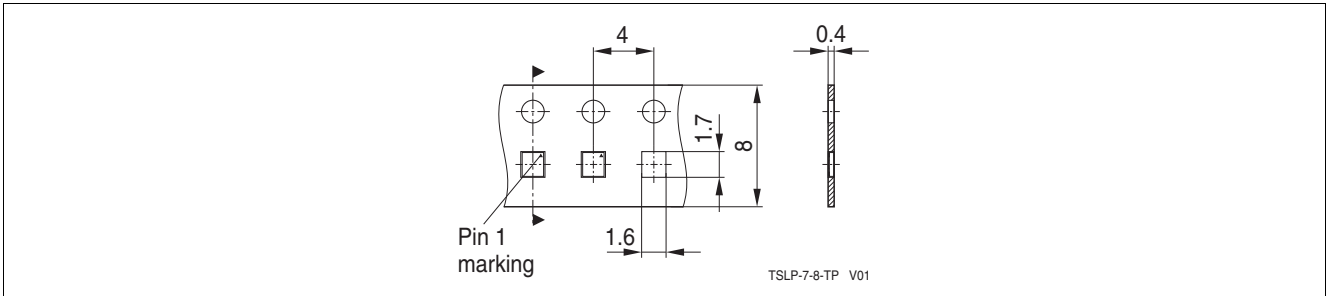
Tape & Reel Dimensions (Ø reel 180 mm, pieces/reel 7500)
